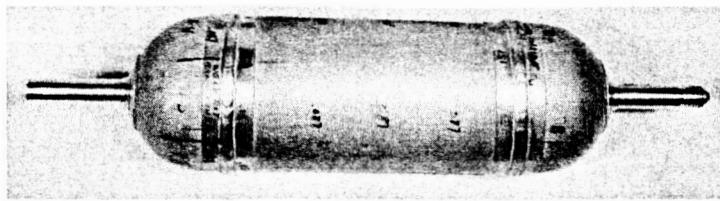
shows a second 260-inch-diameter casing which was welded by the multi-pass technique. This casing passed the hydraulic proof test and subsequently was successfully ground test-fired. This engine, incidentally, uses an ablative nozzle with an 89-inch-diameter throat. The chamber pressure is 600 psi and the flame temperature 5500° F with a 2-minute firing time.
